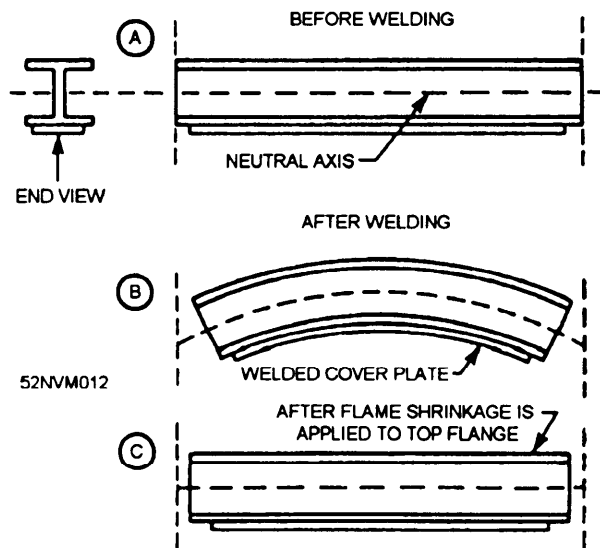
Flame shrinkage used to straighten beam with a welded cover plate.
